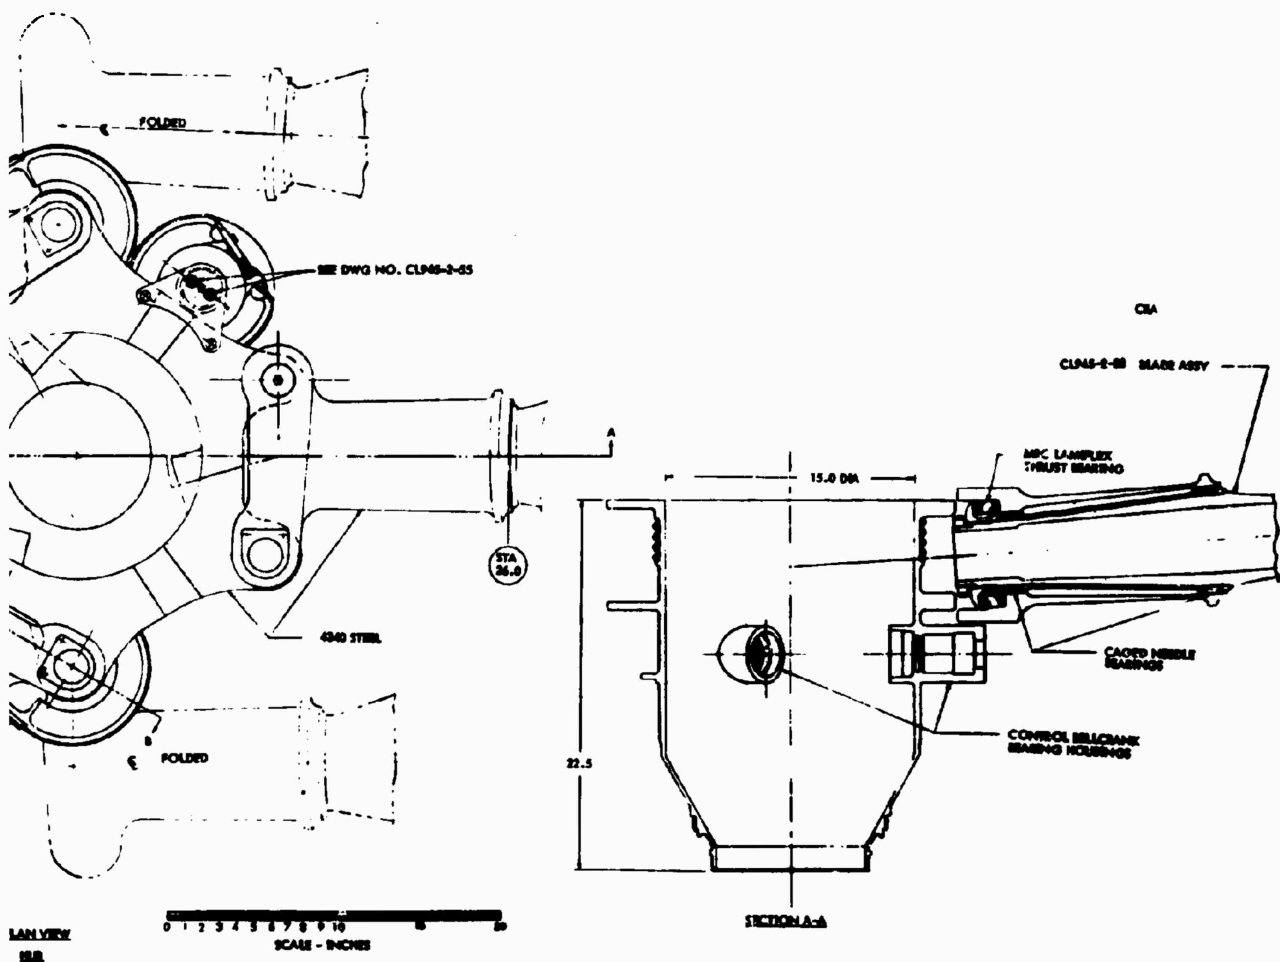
Main Rotor Hub and Blade-Folding Mechanism.
